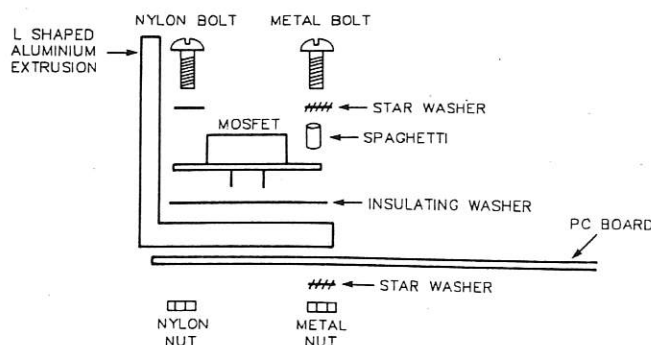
How the heatsink bracket and MOSFETs are mounted to the pc board.
